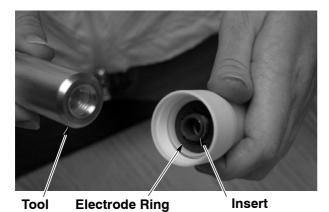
Nozzle Disassembly Step 1 (Shown with Nut Installed)
